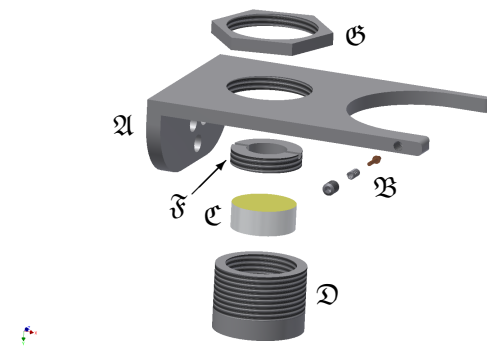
Assembly of the Main Chamber Sample Transfer — A magnetically coupled transfer rod^a (not shown) mounted on an *xy*-stage (not shown) carries the sample bracket (A). The sample (not shown) is secured in its reception by a small spring loaded copper pin (B). The sample carrier (A) also offers the option to mount a mirror^b (C) in the main chamber. It is secured in its positioner (D) by a small retainer ring. The position can be fixed by a small counter nut (E).
